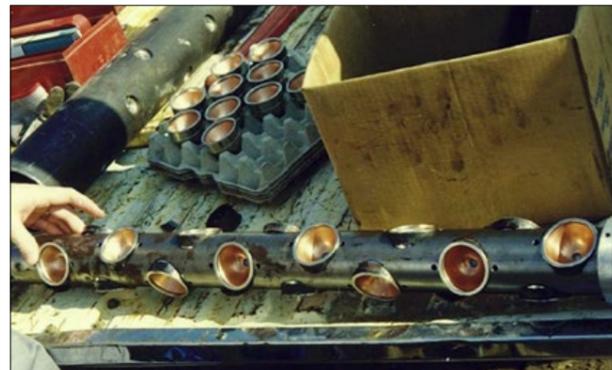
Shaped charges assembled in a perforating gun [2] (Courtesy EPMA)
